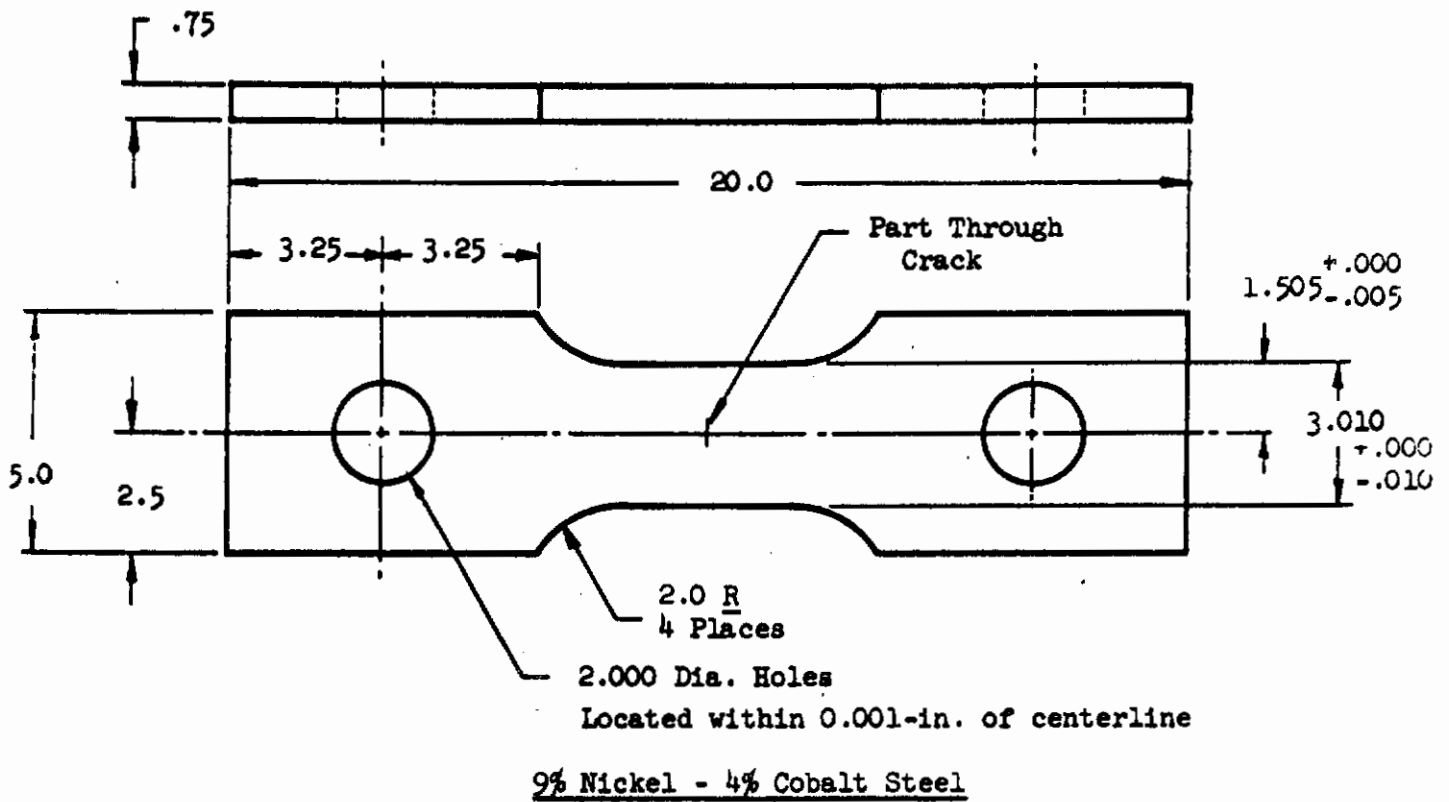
PART-THROUGH-CRACK (PTC) TENSILE-SPECIMEN CONFIGURATION FOR EVALUATING THE 3/4-INCH-THICK PLATE MATERIALS
